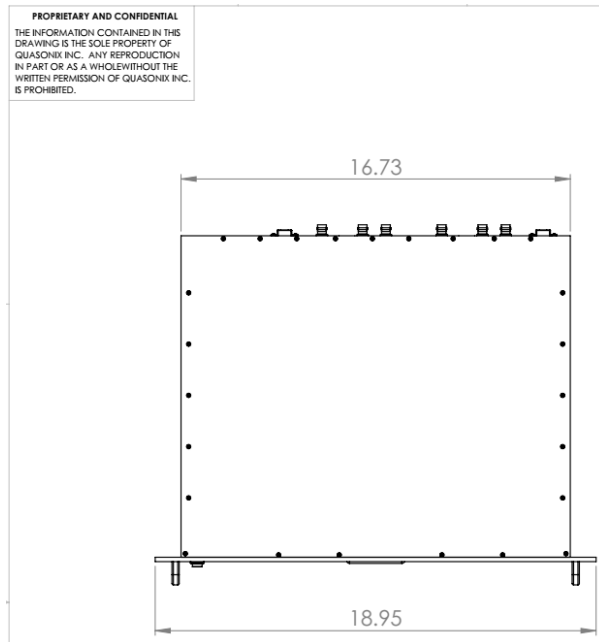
Mechanical Drawing – 1U Top View - EVTM 1U Rack Mount Encoder/Decoder
